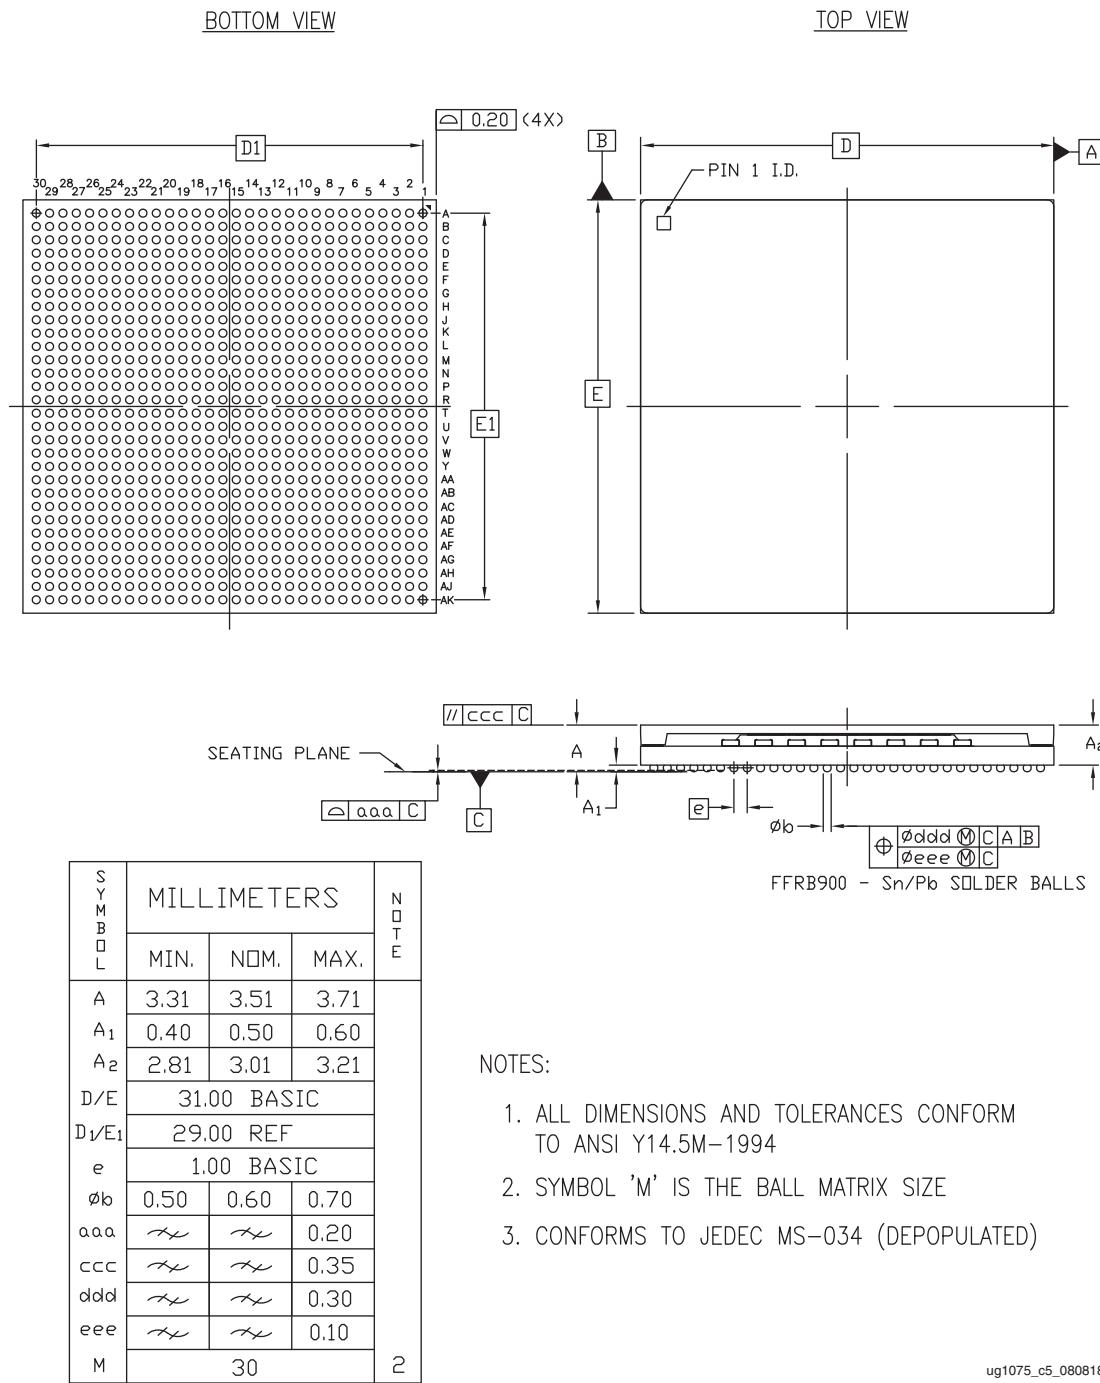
Package Dimensions for FFRB900 (XQZU7EV)
